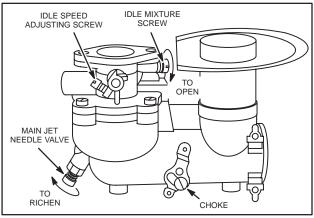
LARGE FLO-JET, HORIZONTAL CRANKSHAFT
